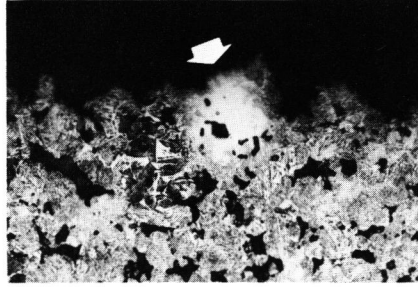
Apparent porosity in projected fracture surface.
